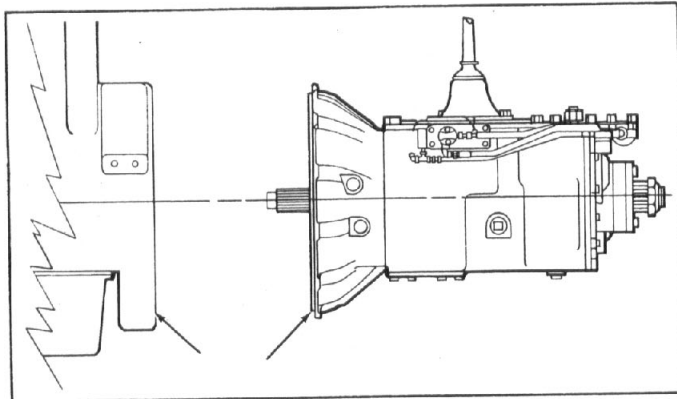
Inspect for worn or fretted pilot on transmission clutch housing and engine flywheel housing.
